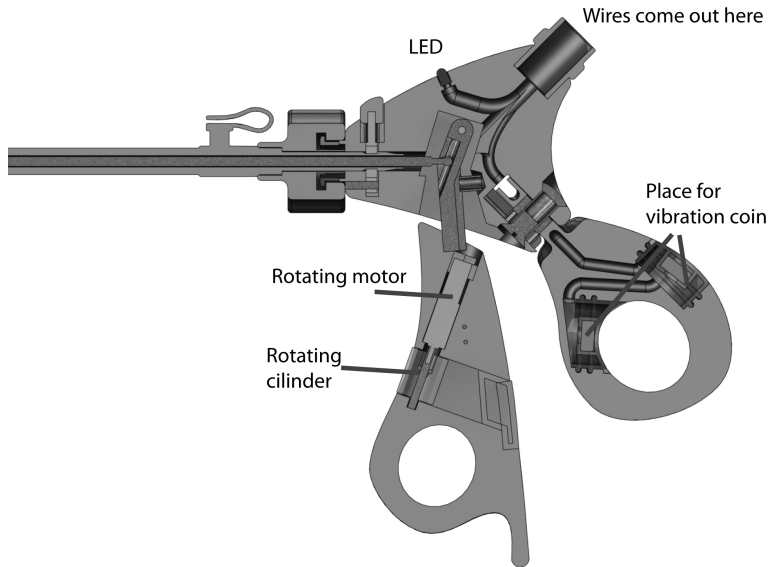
Miniaturized vibration motors are placed in the back hinge where the holes for the vibration caps are visible. The motor and turning cylinder is placed in the front hinge.
